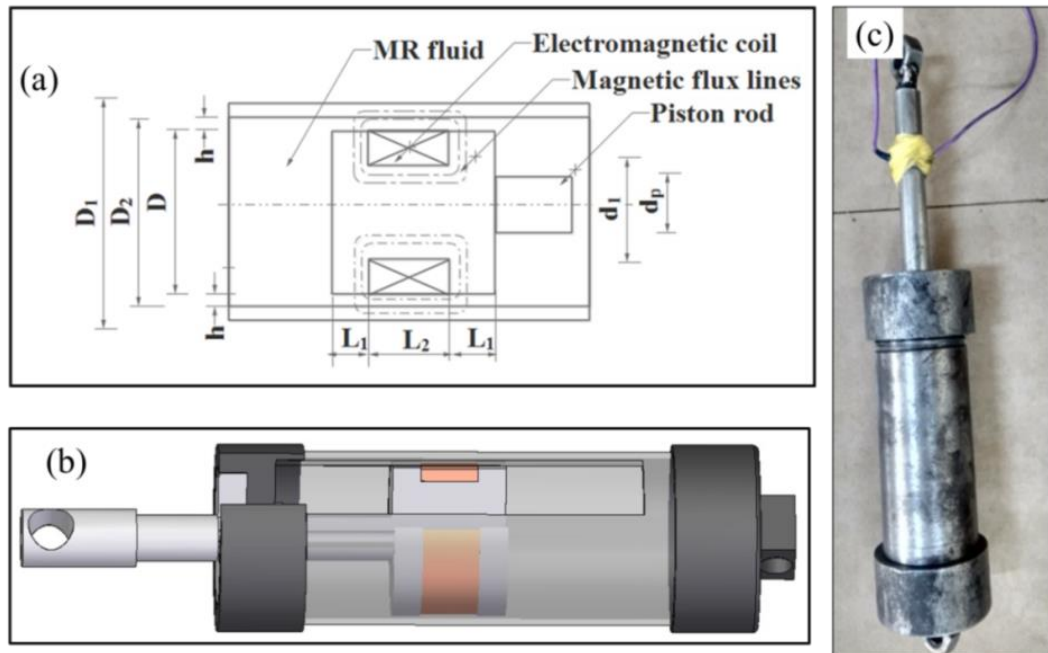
MR damper (a) schematic drawing of MR piston, (b) 3D model view, and (c) fabricated and tested MR damper
